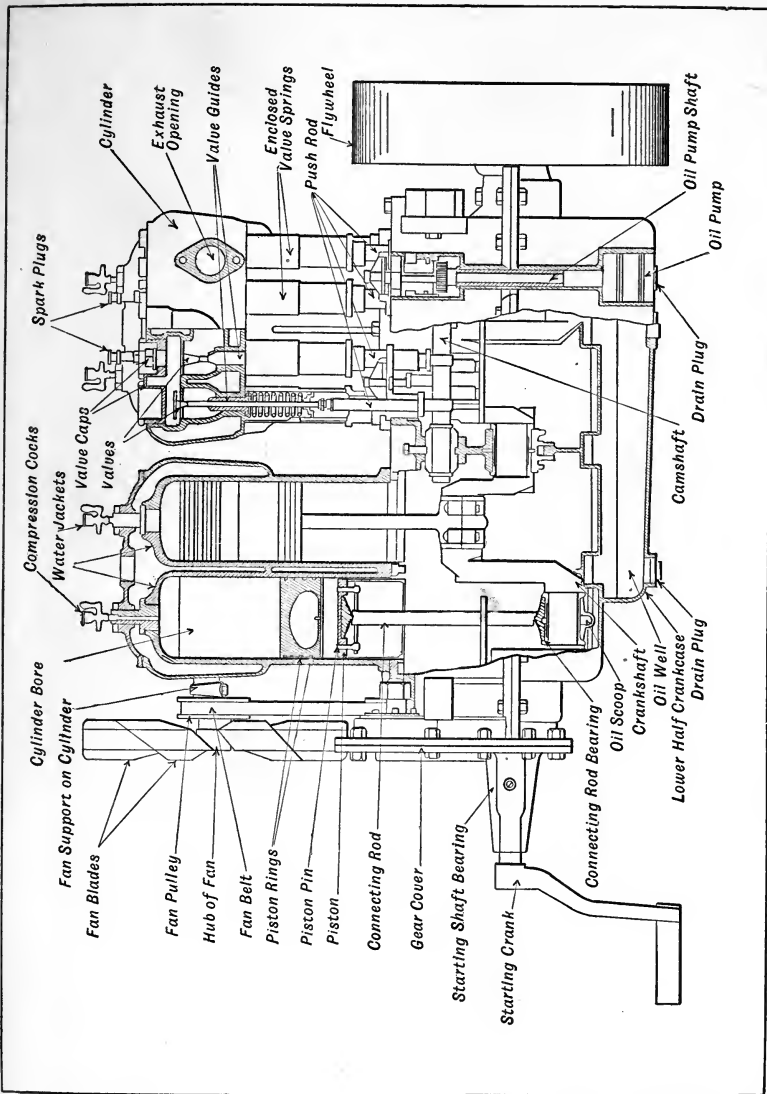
Sectional View of Typical Four-Cylinder Cycle, Four-Cylinder Engine, Showing Important Internal Components and their Relation to Each Other.
